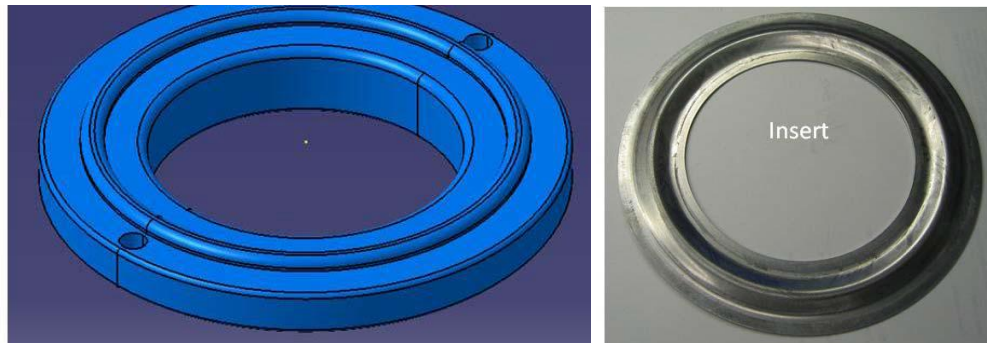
Revised lock-bead geometry and the aluminum insert for further softening of the radius of the lock-bead (photograph).
